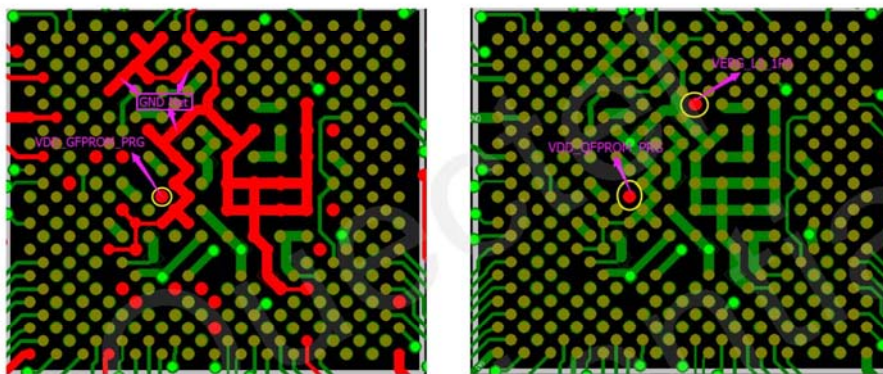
PCB Designs of BG96 R1.1 and R1.2
